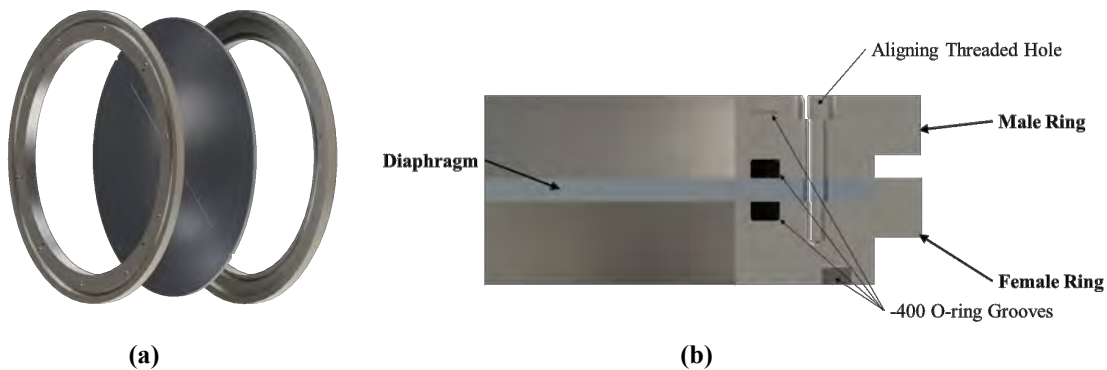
(a) Diaphragm holder exploded view with (left) male holding ring, (middle) etched diaphragm, and (right) female holding ring. (b) Diaphragm holder cutout with labels and locations of O-ring grooves, dowel pin alignment holes, and threaded holes.
